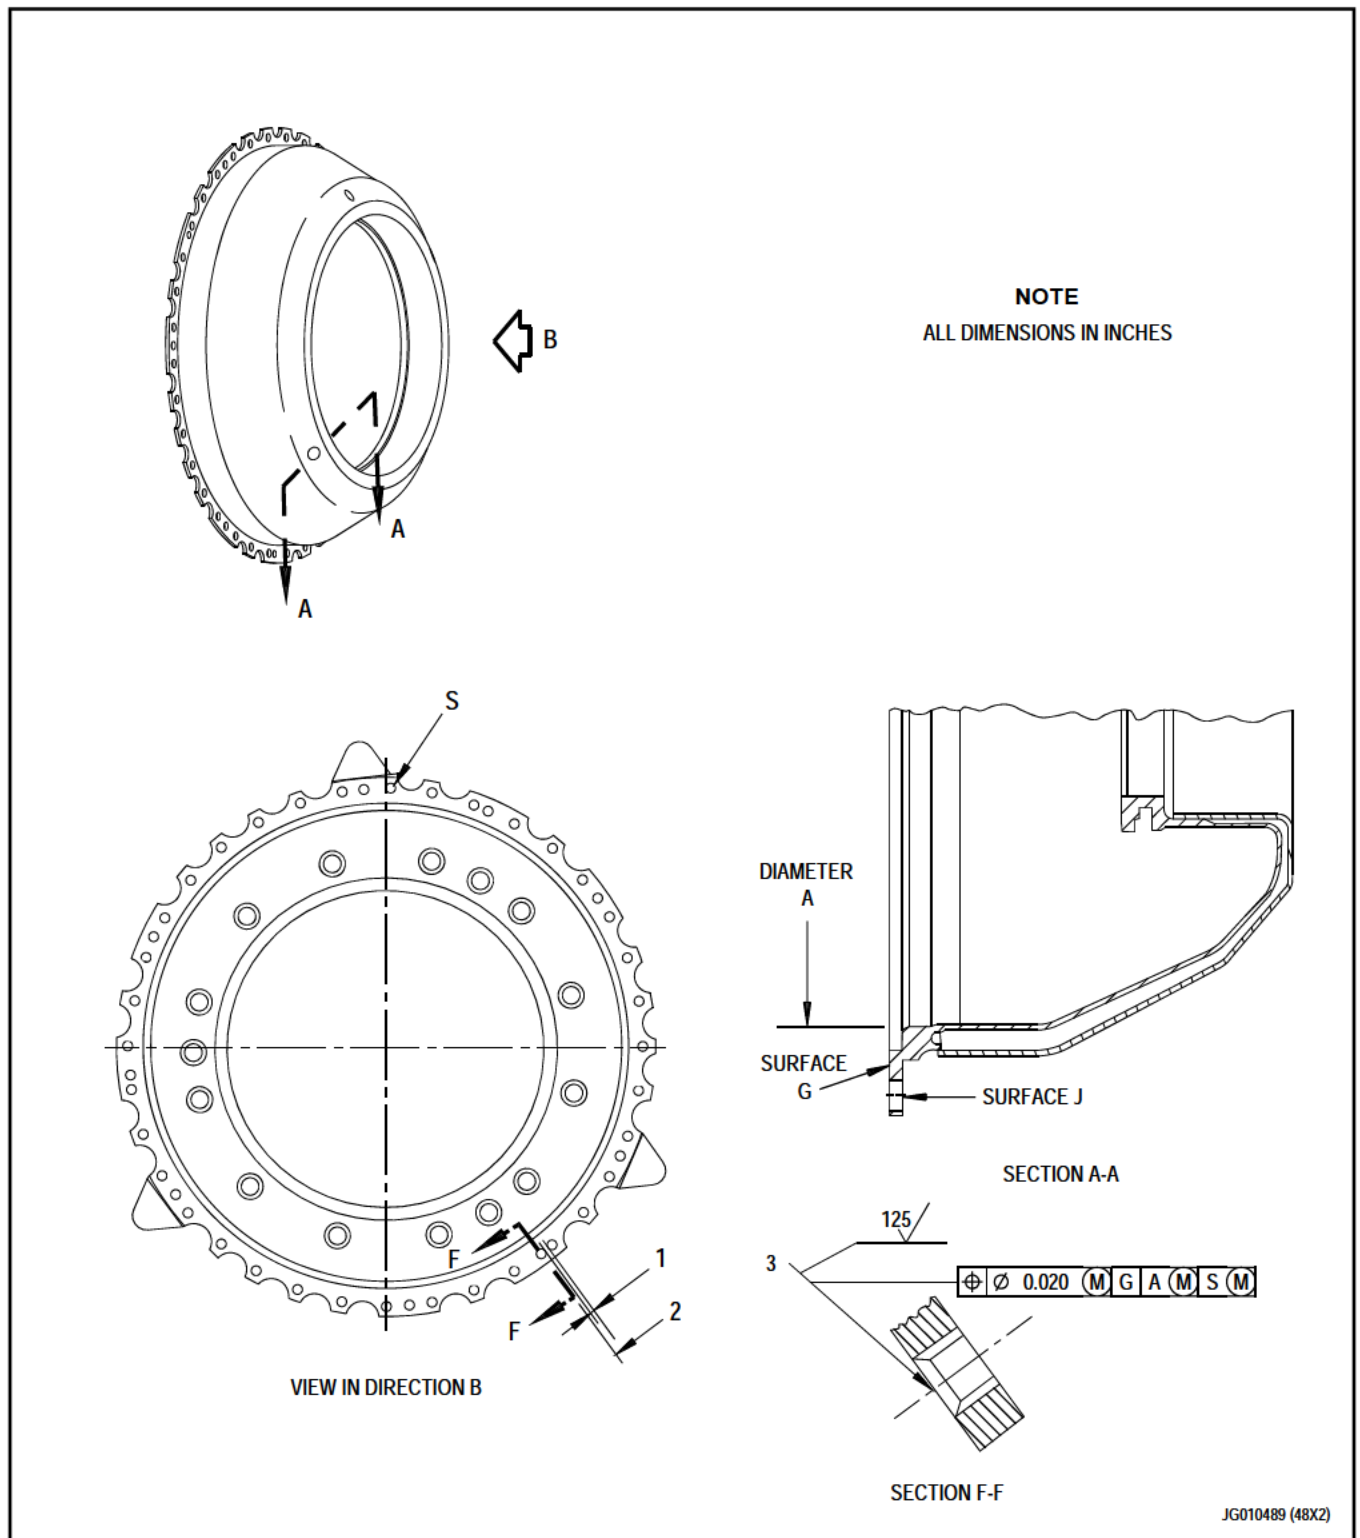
No. 4 Bearing Seal Rear Support Assembly - Jackscrew Hole Repair
